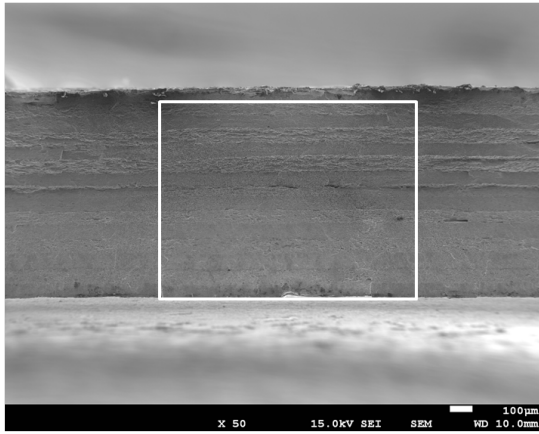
Fractured tensile specimen of an optimized weld
